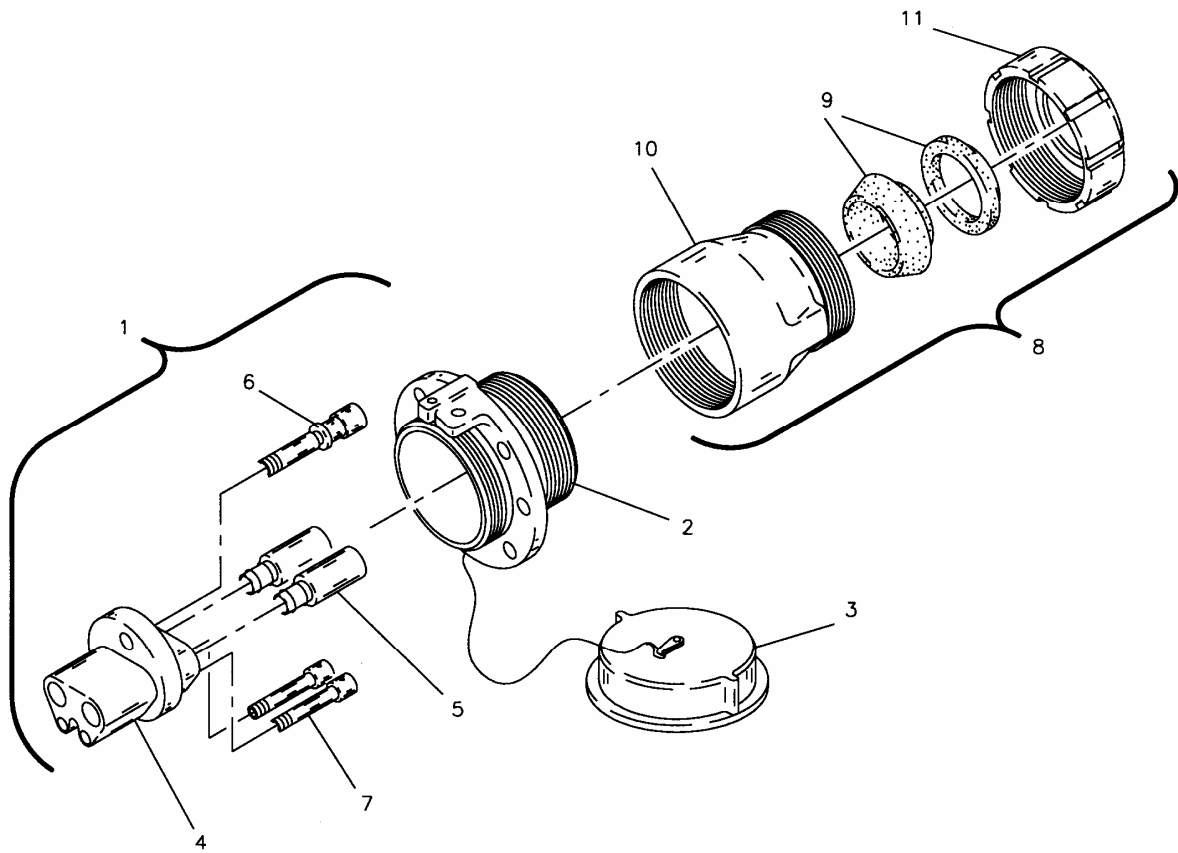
ALUMINUM PLUG ADAPTORS (A15056)
